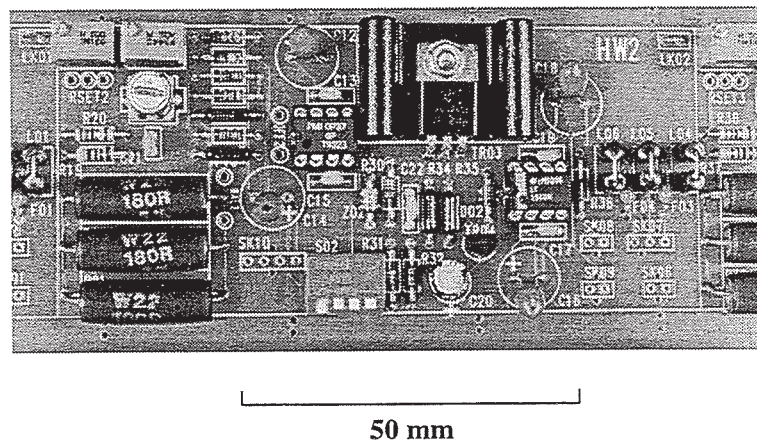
View of the in-shaft Hot-wire Anemometer PCB
